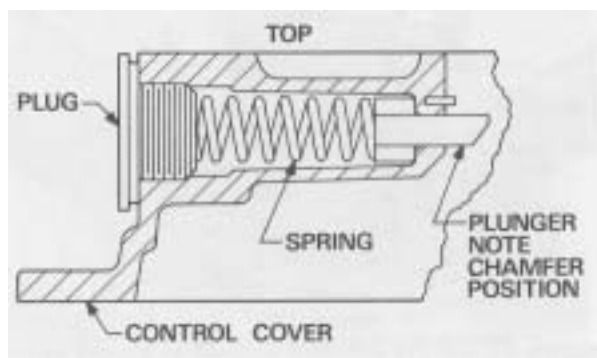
Install reverse latch plunger, spring and retaining plug. Tighten plug securely.
